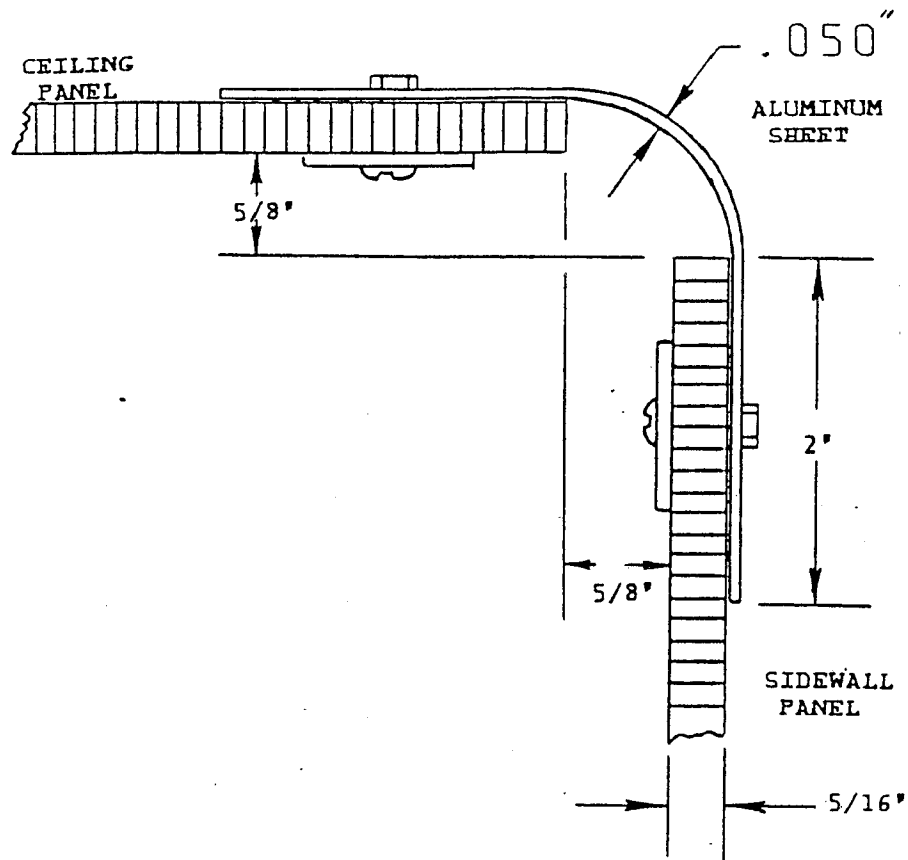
TYPICAL AIRBUS CORNER FIXTURE
